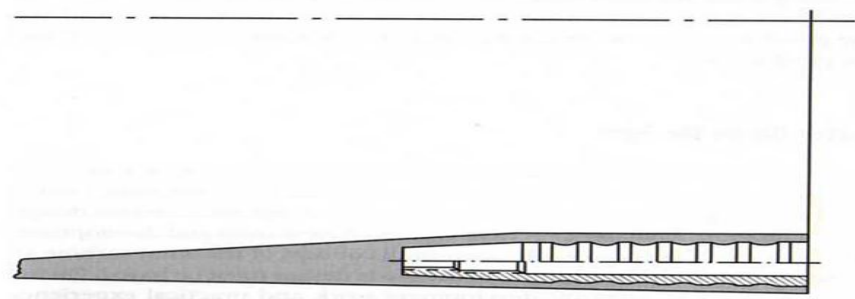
Connection sleeves bonded in blade root pioneered by Vestas [9]
